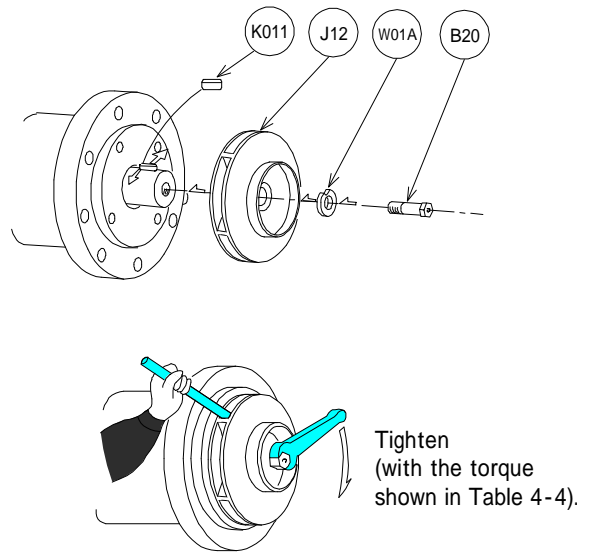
Method of Mounting (Motor Frame No. H1, H2)
